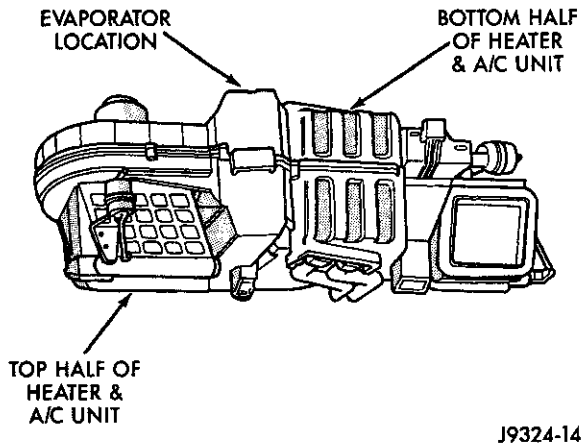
Evaporator Coil Location in Heater-A/C Housing (Upside Down)
